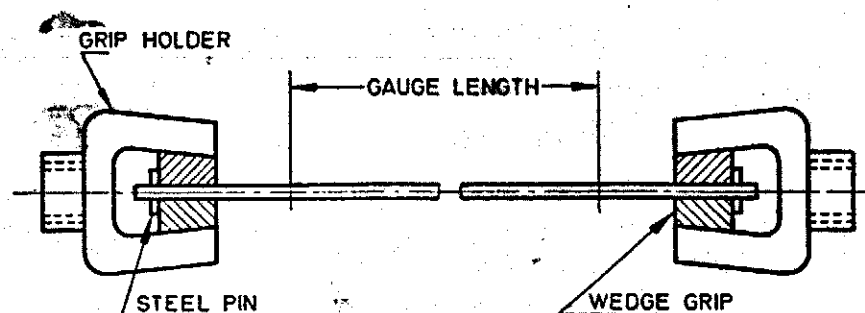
METHOD OF GRIPPING TEST PIECE FOR TENSILE AND ELONGATION TESTS
